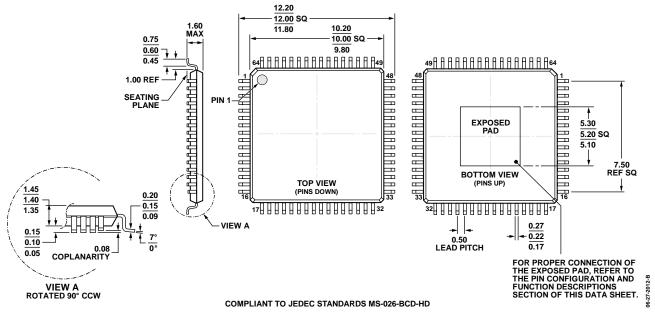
64-Lead Low Profile Quad Flat Package [LQFP\_EP] (SW-64-2) Dimensions shown in millimeters
